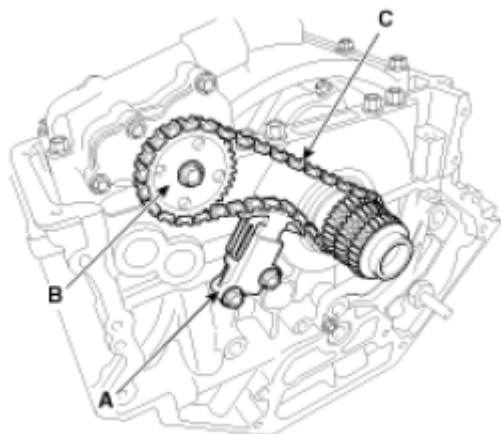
Identifying Oil Pump Chain Tensioner, Oil Pump Sprocket And Chain
